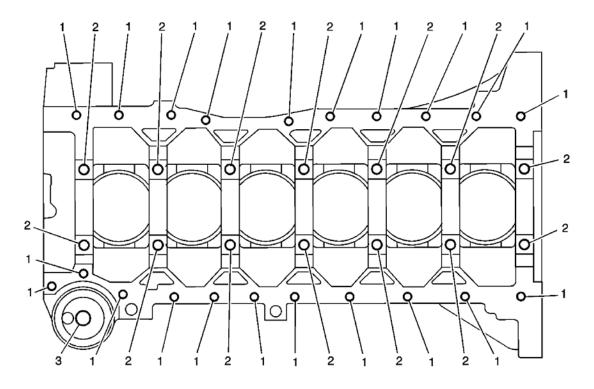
Engine Block Thread Repair - Bottom View Courtesy of GENERAL MOTORS CORP.
